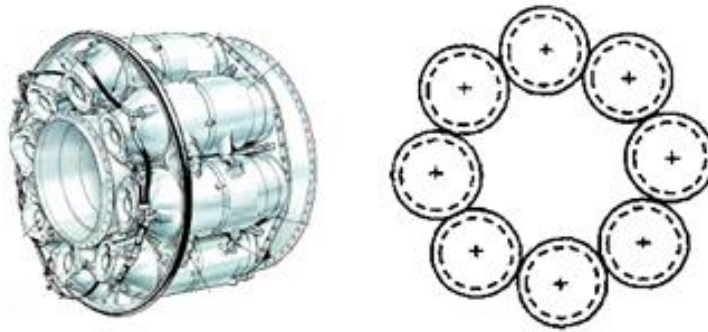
Can Combustion Chamber with Cross Sectional View [6] [11]
